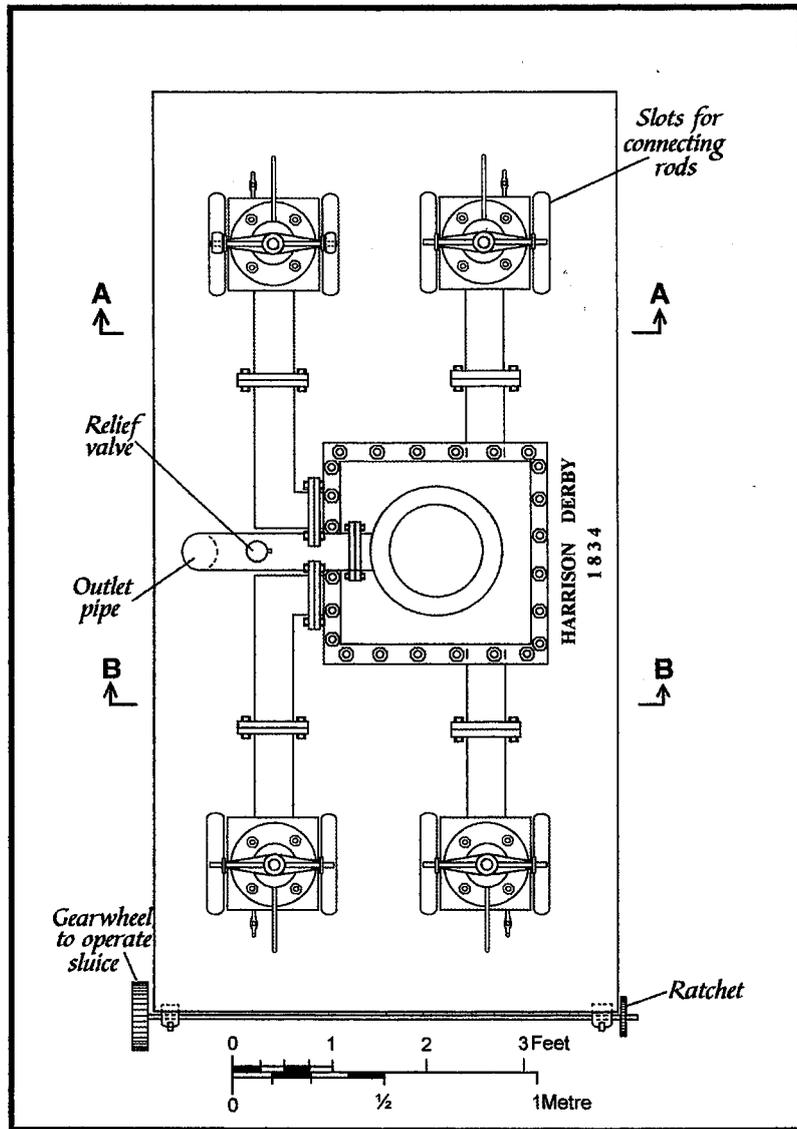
A plan view of the four pump cylinders, the central valve chest and the accumulator tank. Note the ratchet, shaft and gear wheel which were part of the sluice control system.
